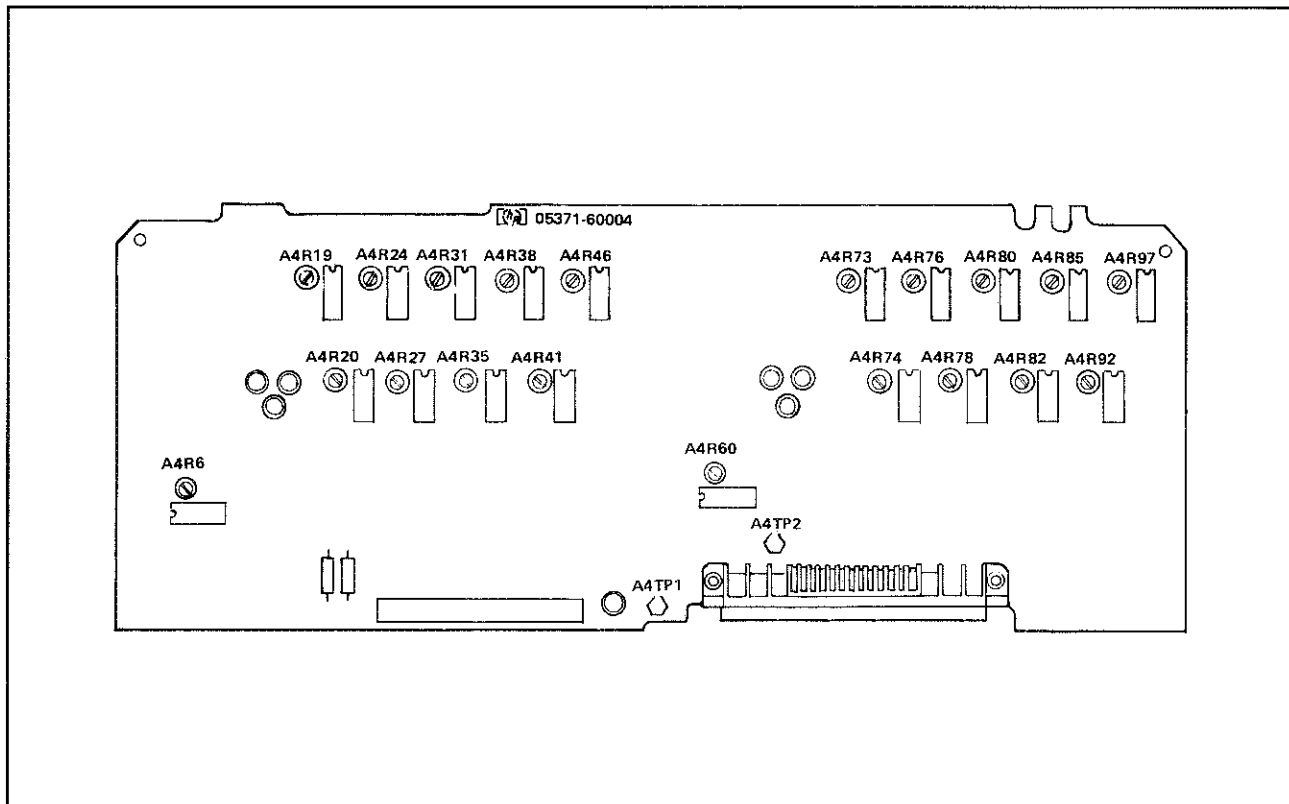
B. A4 Interpolator Board Board Adjustment Locator
